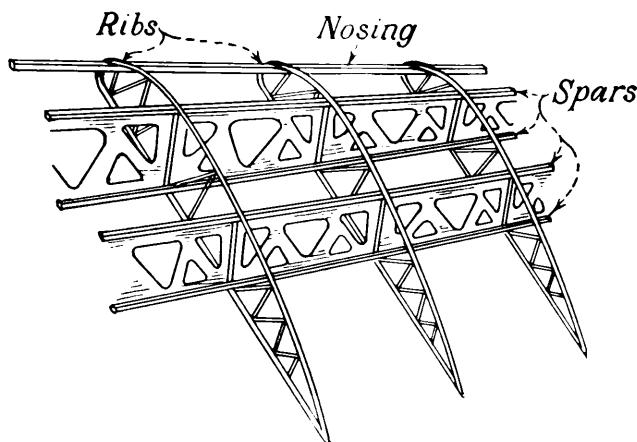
The wing assembled. The ribs must be placed close enough together so that they will hold the wing covering taut.
